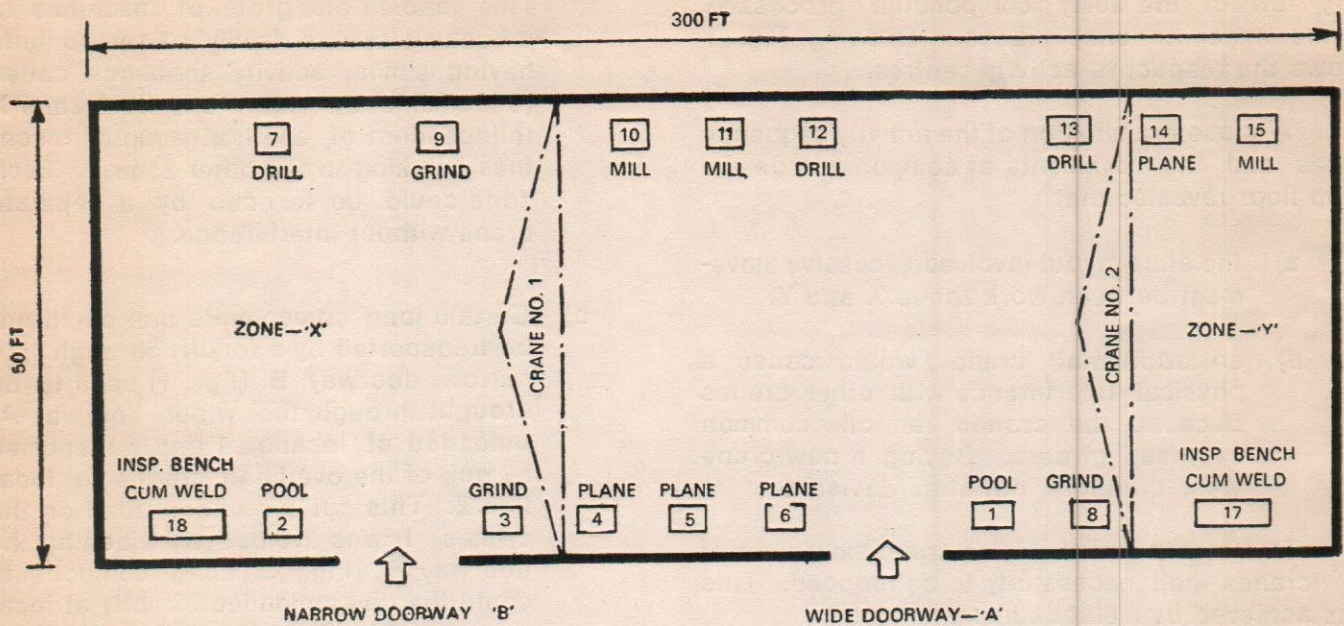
Schematic Layout Drawing No. 1 (Not to Scale)
